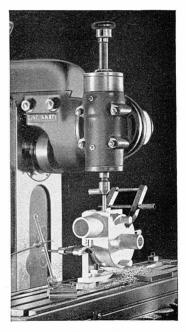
High Speed Universal Milling Attachment Equipped with Quill Device
